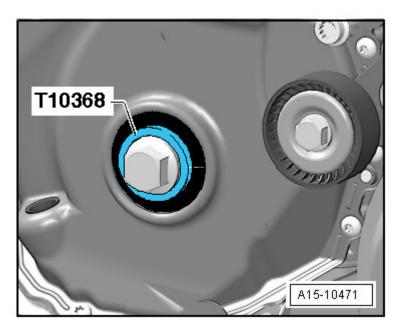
Identifying Vibration Damper Bolt And Thrust Piece T10368 Courtesy of AUDI OF AMERICA, LLC
